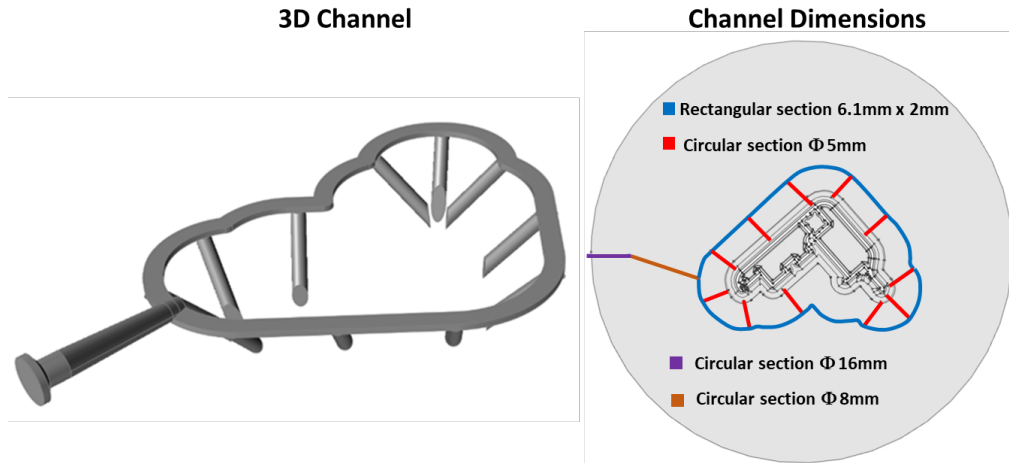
The cooling channel designed by the die maker [2]: 3D rendering of the cooling path (left), Channel dimensions (right).
